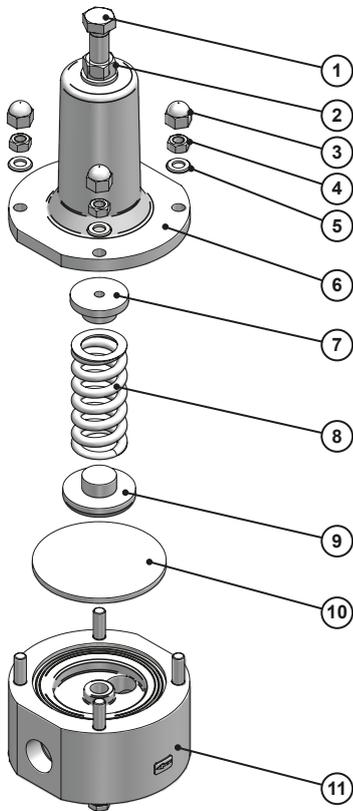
Exploded diagram of the back-pressure and pressure-relief valves DN25 - DN65
